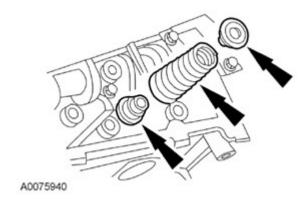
Locating Valve Spring Retainer, Valve Spring, Valve Stem Seal And Valve Courtesy of FORD MOTOR CO.
